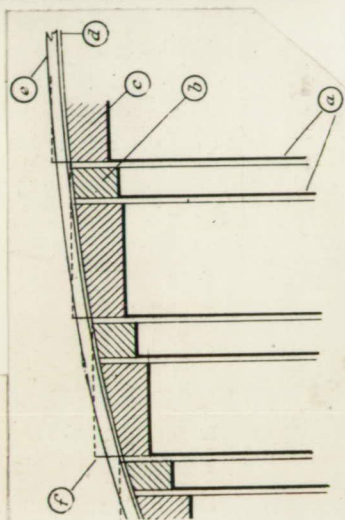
Detail of wing structure. a, plywood webs; b, c, flanges of large and small elements; d, plywood covering; e, outside strip; f, corner of block, removed with plane after glueing.
